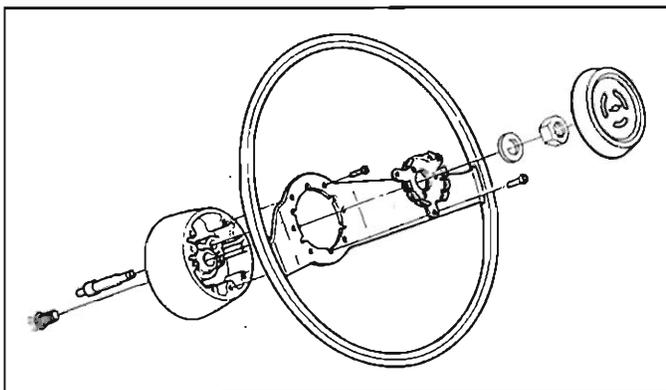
Simulated Wood Steering Wheel and Attaching Parts
